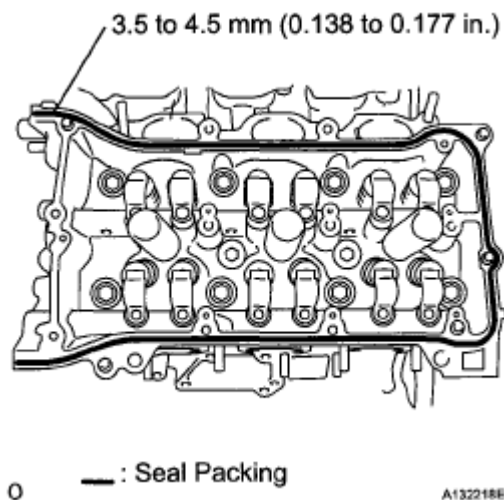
Identifying Camshaft Housing Seal Packing Area
